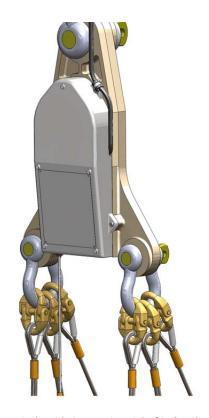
New Style with Connecting Links (Order Single or Pair)
